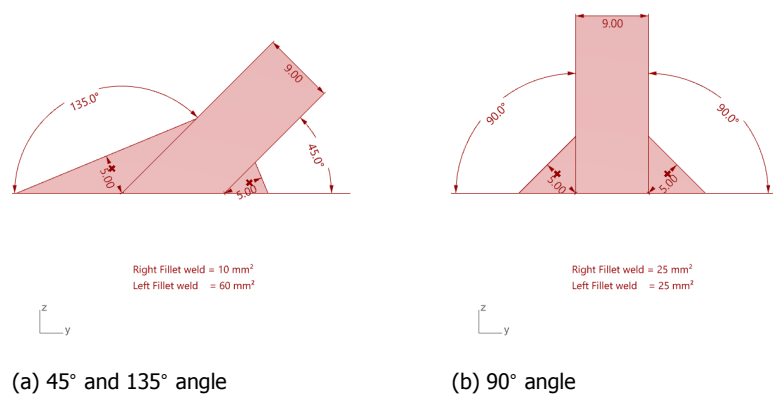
Welding surface of fillet weld per angle in detail, throat thickness = 5 mm
